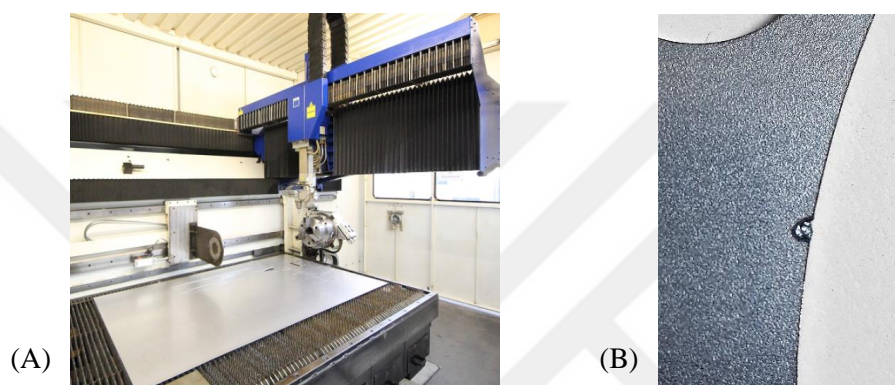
(A) Laser Cutting Machine, Retrieved from Kistner Machine Tools (2001, p.11) and (B) production defect during laser cutting
